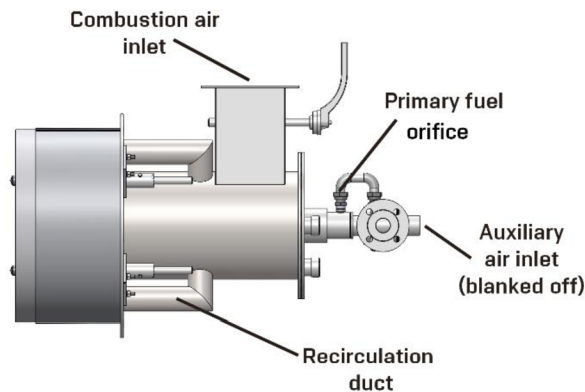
Side view of the fuel-staged burner with internal recirculation [50]
